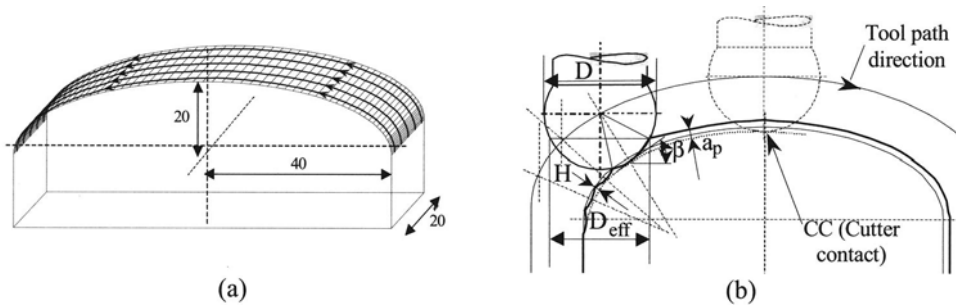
(a) Machined part, (b) Tool position on the work surface.
